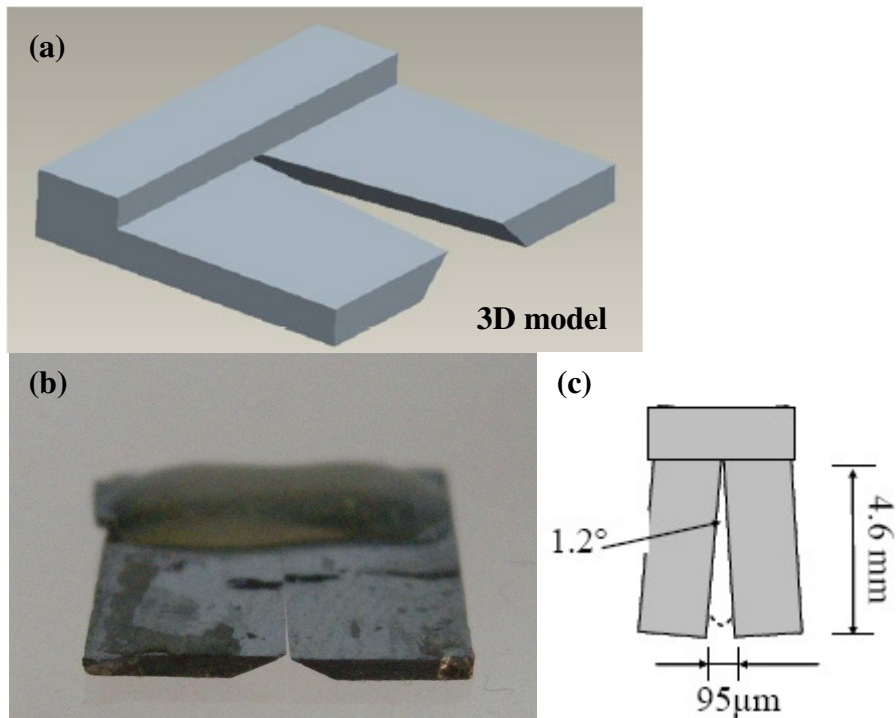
TMA-MBT shearing plate (a) model, (b) photo, and (c) dimensions
